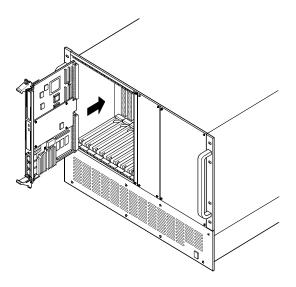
MVME5100 Installation and Removal From a VMEbus Chassis
